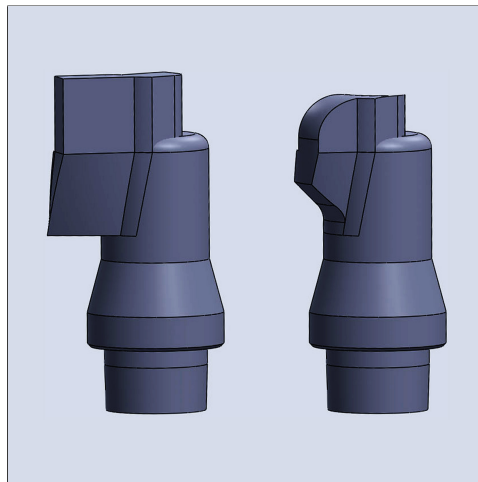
3D model of blade before (left) and after (right) being moulded by the blade profile.
